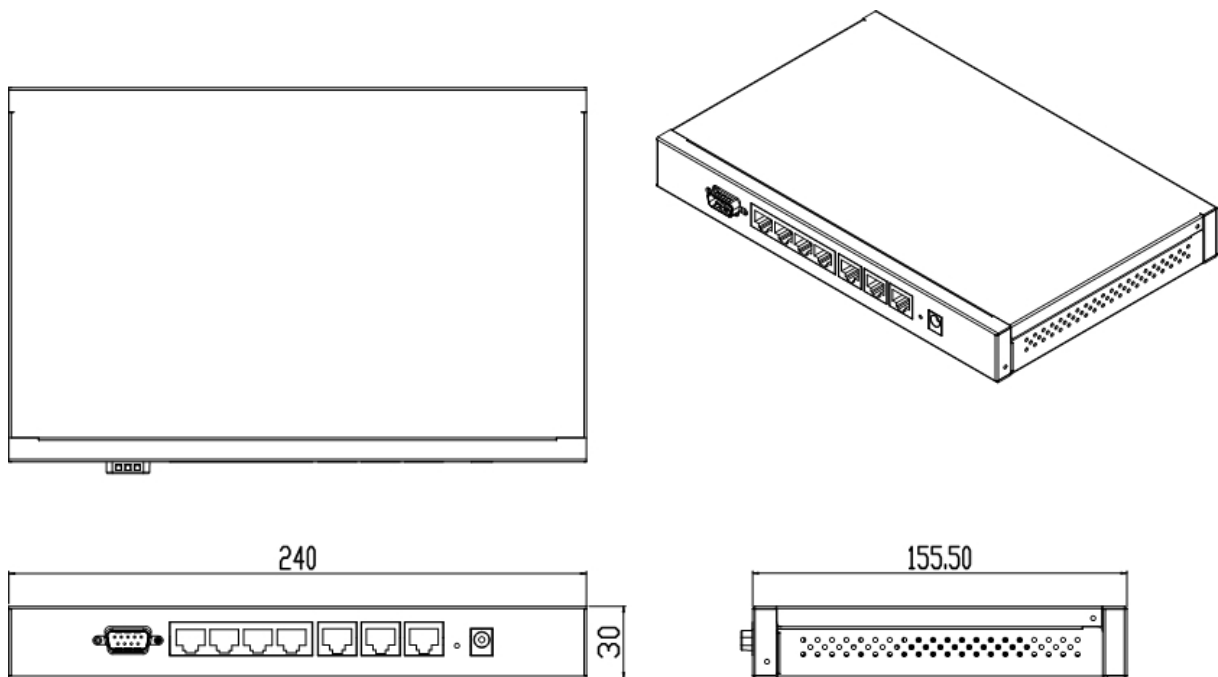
FW-3600 Chassis Dimensions (units in mm)
